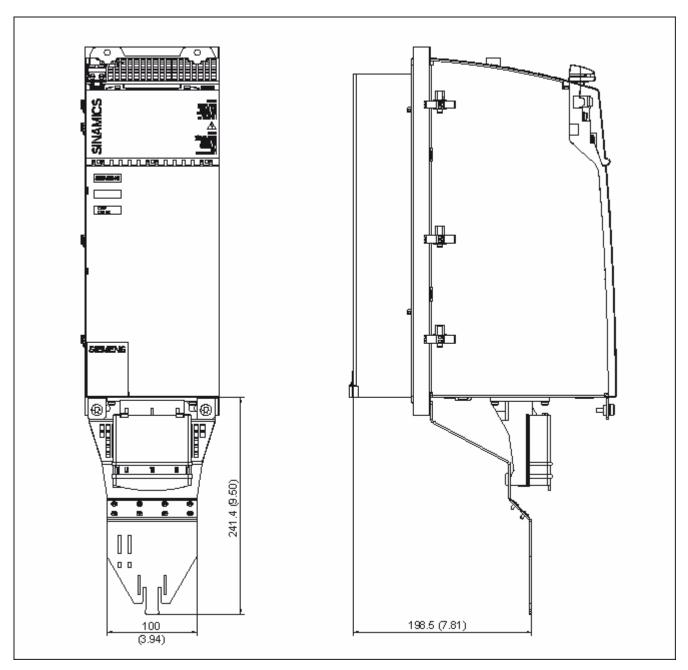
Dimension drawing of shield connecting plate on a 150 mm component with external air cooling, all dimensions in mm and (inches)
